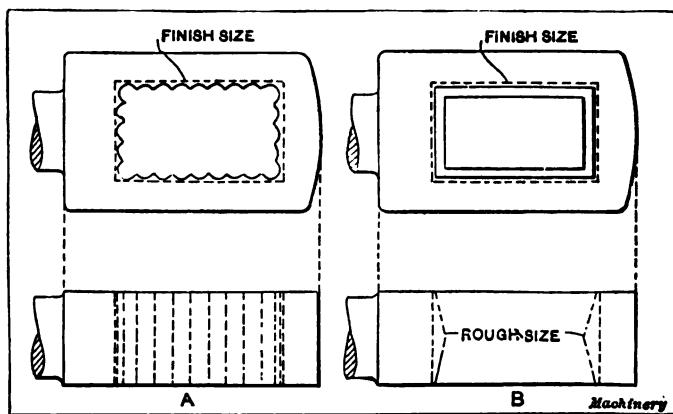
(A) Rod End Blocked Out by Drilling.
